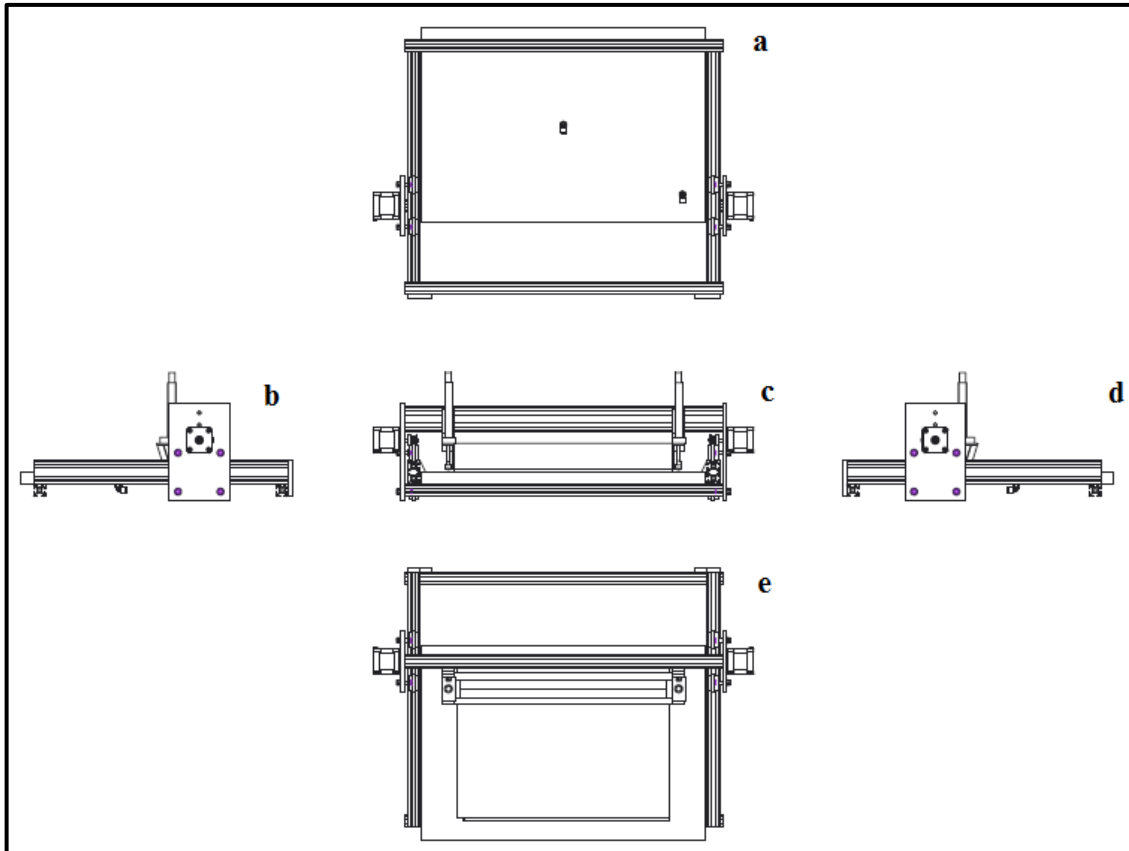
Different perspective views of the Knife Coating system: a) lower section, b) right lateral section, c) frontal section, d) left lateral section and e) upper section.
